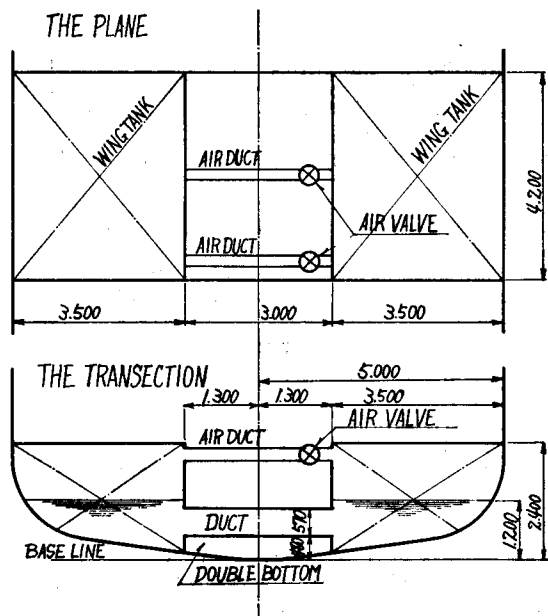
Rough drawing of anti-rolling tank on Okesa-maru
